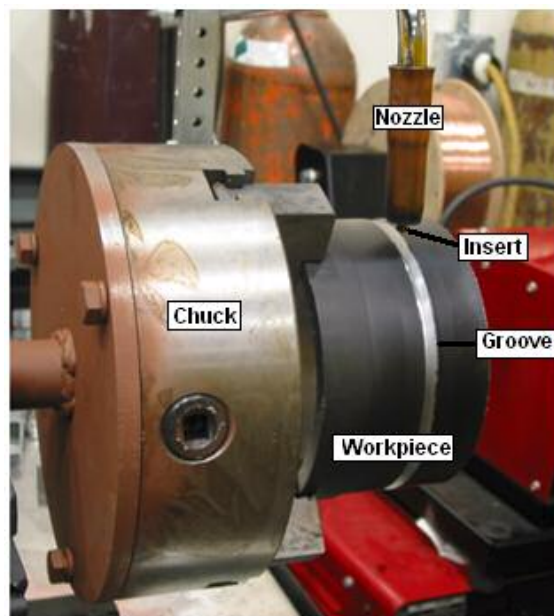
Welding nozzle and insert positions relative to the V-groove
